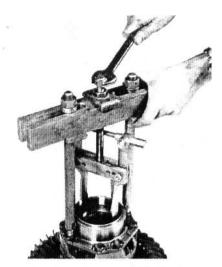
Removing R.H. Carrier Bearing Cup (Non-Diff. Lock)
